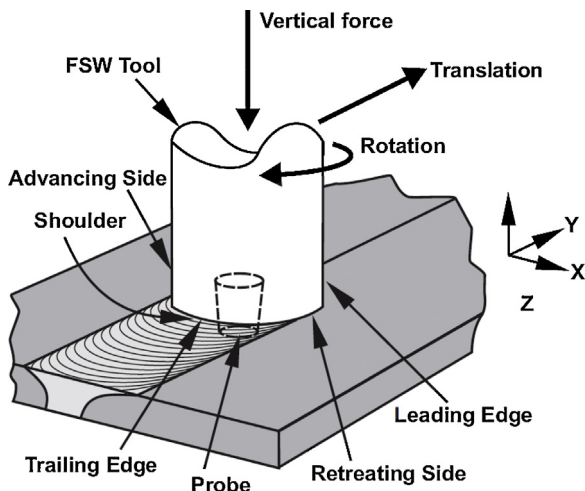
Schematic of friction stir [butt] welding (FSW).
